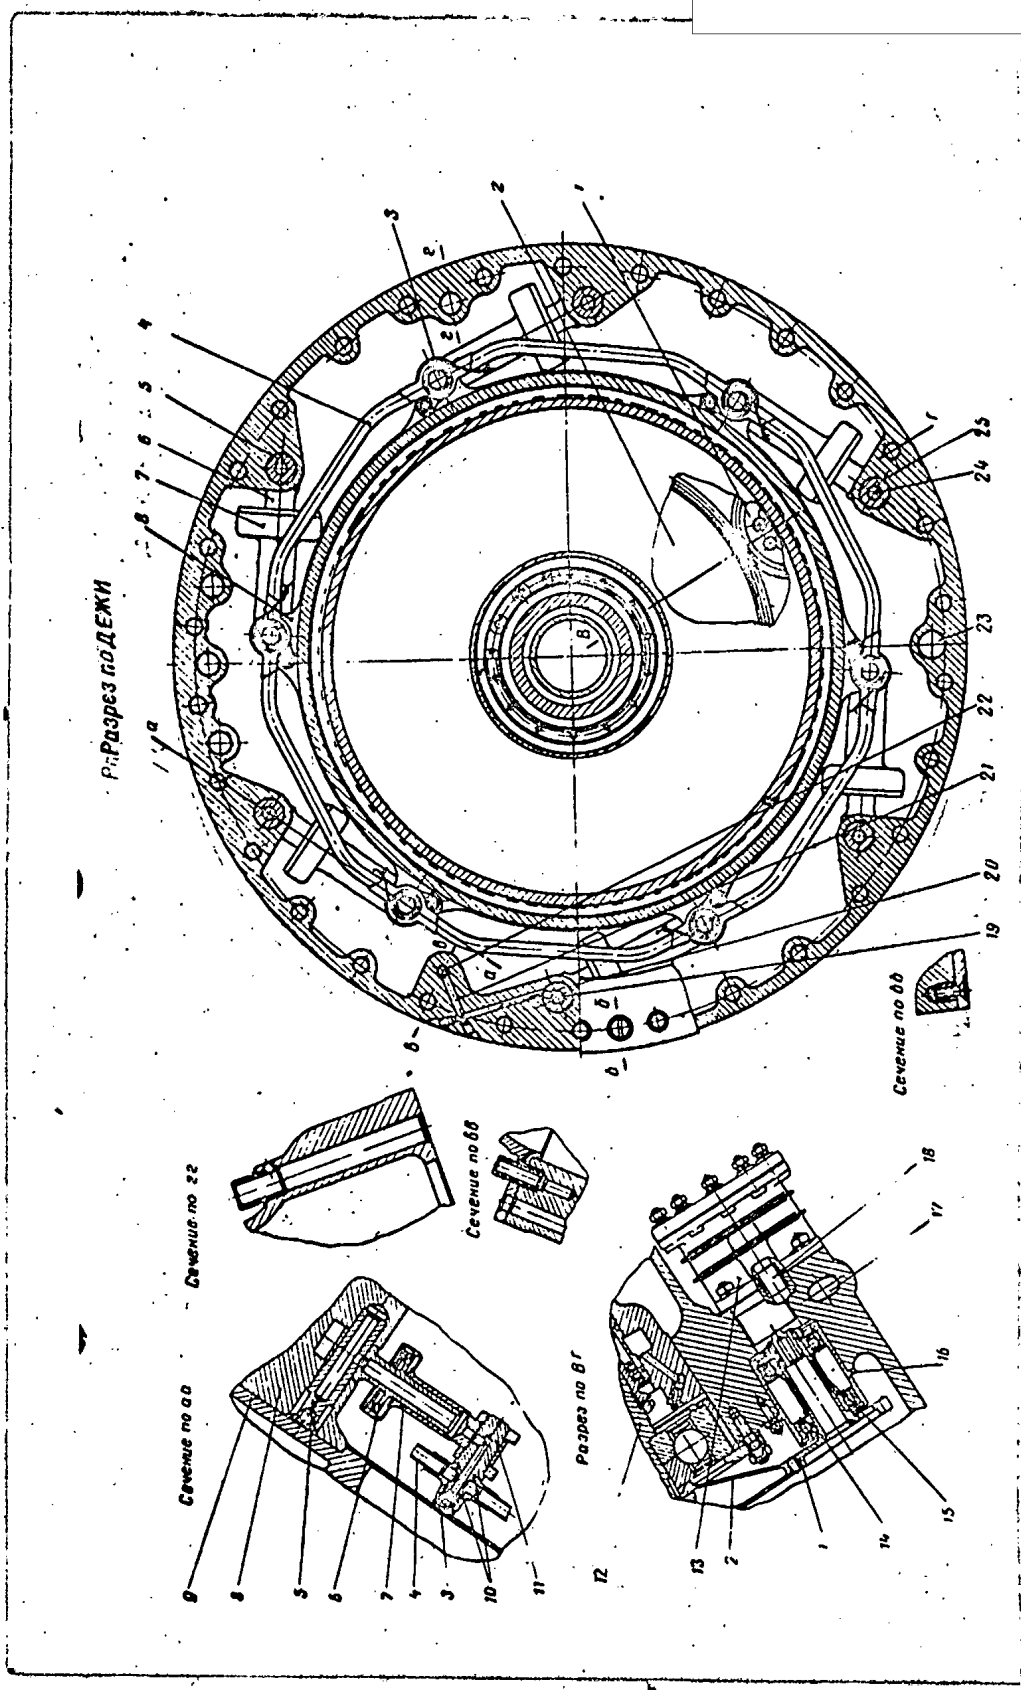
Torque meter - 1. IKM pump driven gear; 2. IKM pump driven gear; 3. Nut; 4. Oil supply line; 5. Pivot [pin]; 6. Piston; 7. Cylinder; 8. Rim [torque meter plate?]; 9. Reduction gear box partition; 10. Rubber seal rings; 11. Cylinder pivot pin; 12. Propeller shaft; 13. MIKM-20 oil pump; 14. Ball bearing; 15. Spacer sleeve; 16. Bearing housing; 17, 18. Oil supply channels for MIKM-20 pump; 19, 20, 21, 22, 23, 24. Holes
